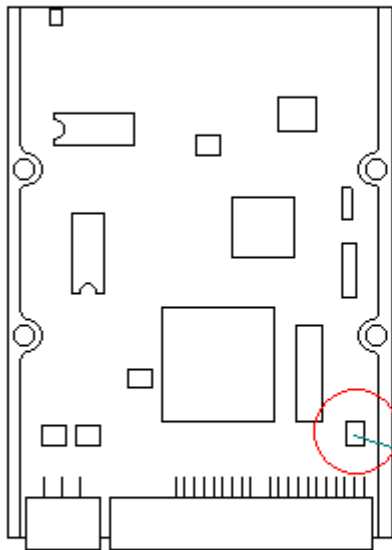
270 MB Seagate IDE Hard Drive Jumper Settings
